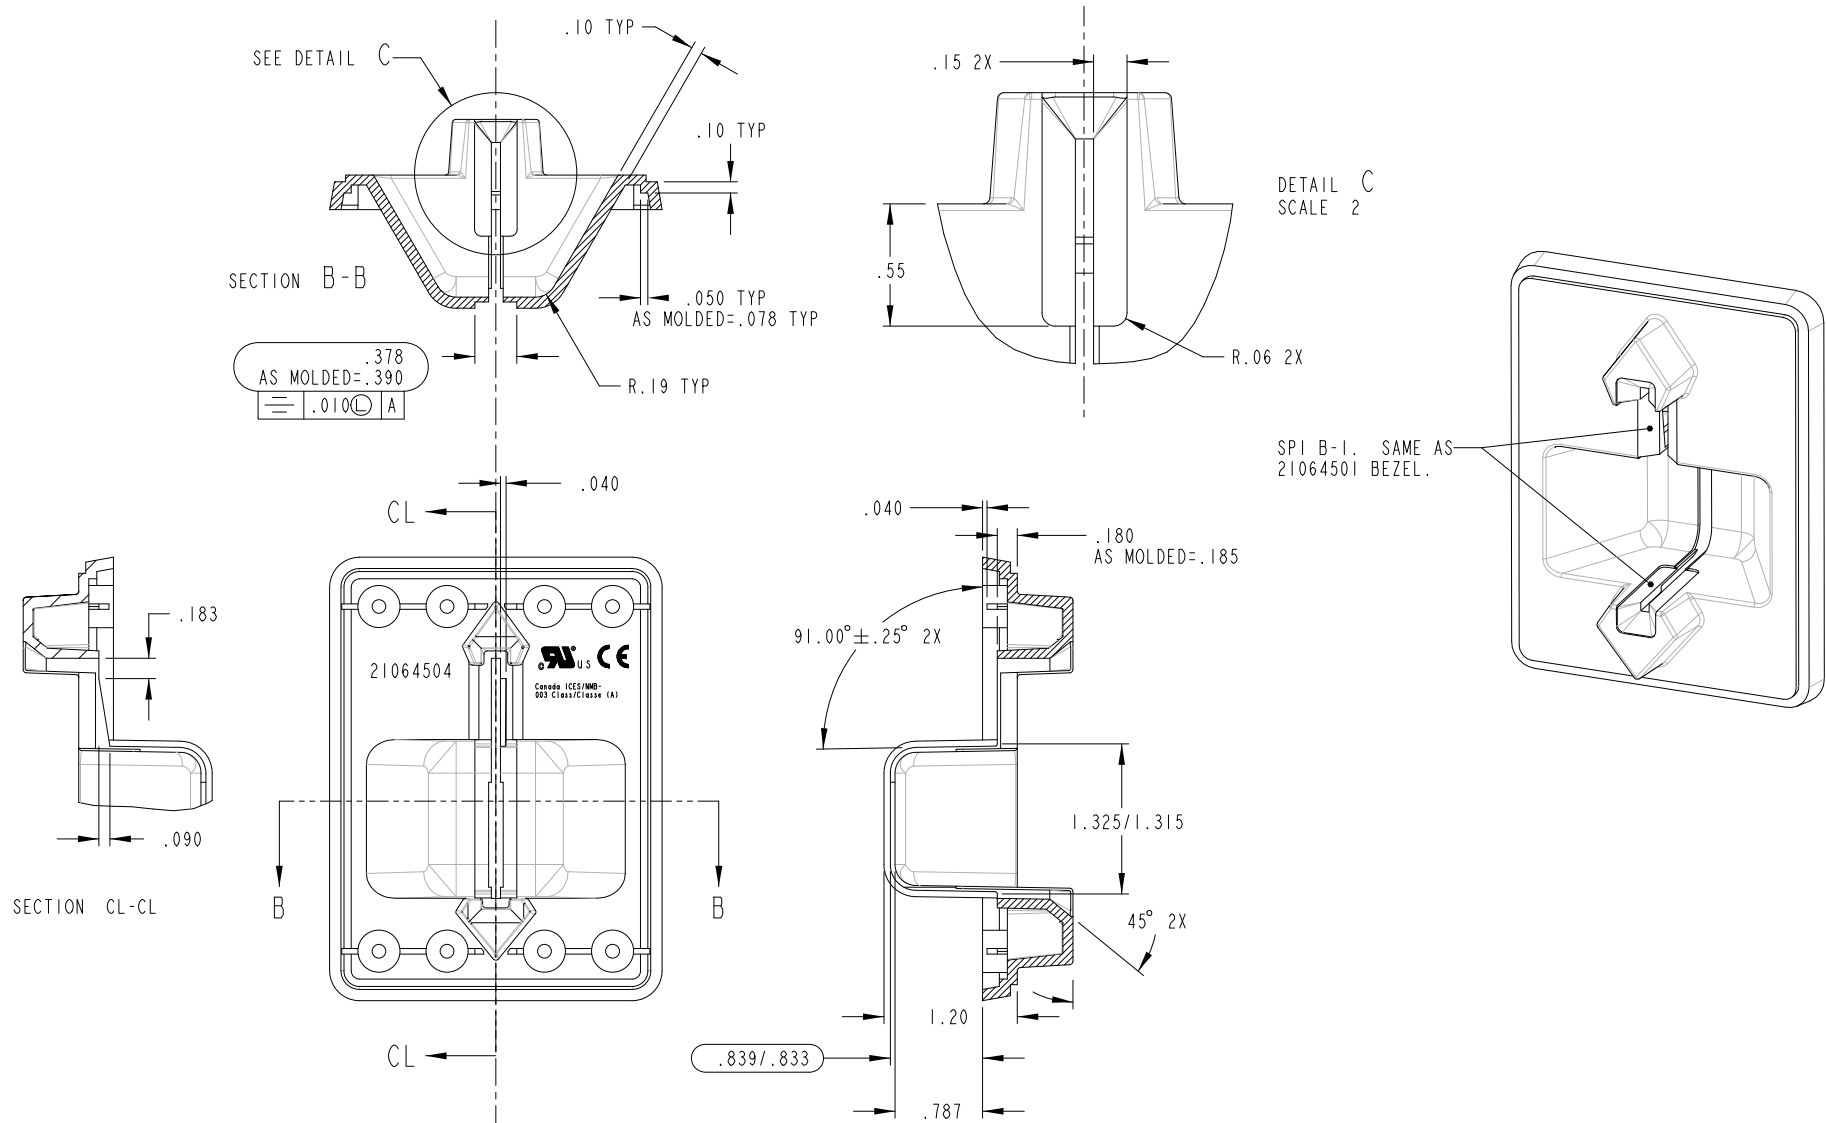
Dimensions for Extended Bezel Design Sheet 2
